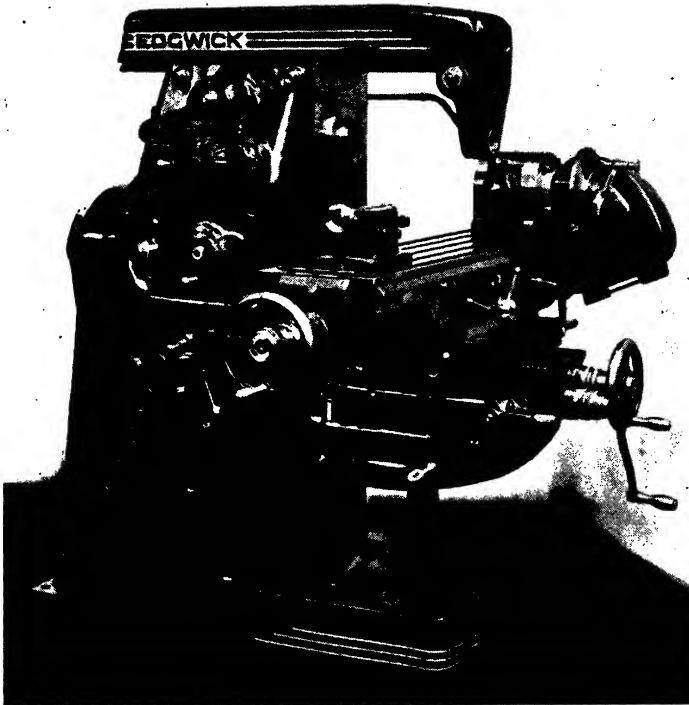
UNIVERSAL MILLING MACHINE: HORIZONTAL TYPE
